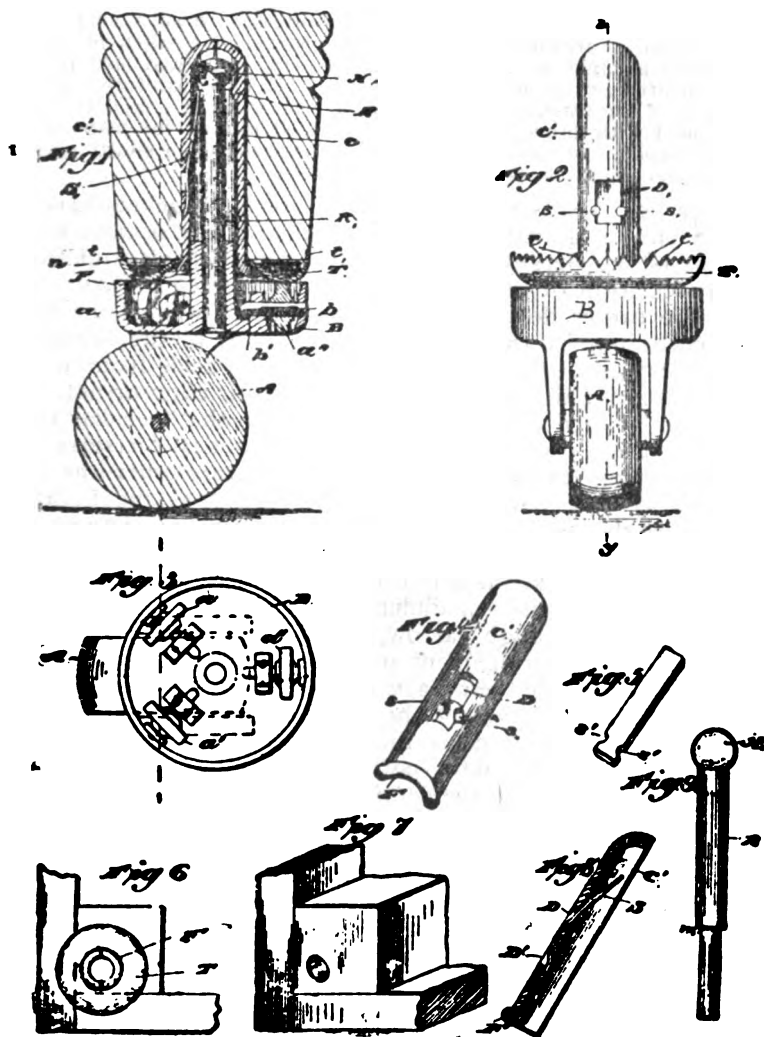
is a vertical sectional view of the caster when inserted, taken on the line X—Y of Fig. 2. Fig. 2 is a front view of the caster, track plate, and socket attached together and removed from the furniture. The track plate in question is shown at T in both figures, and no point in either figure is here involved which is shown below T. Fig. 4 is a perspective view of one part of the socket showing the flange, F, referred to in the claims involved here. There are six claims in the patent. Those here involved are 3, 4, 5, and 6, which are as follows:
